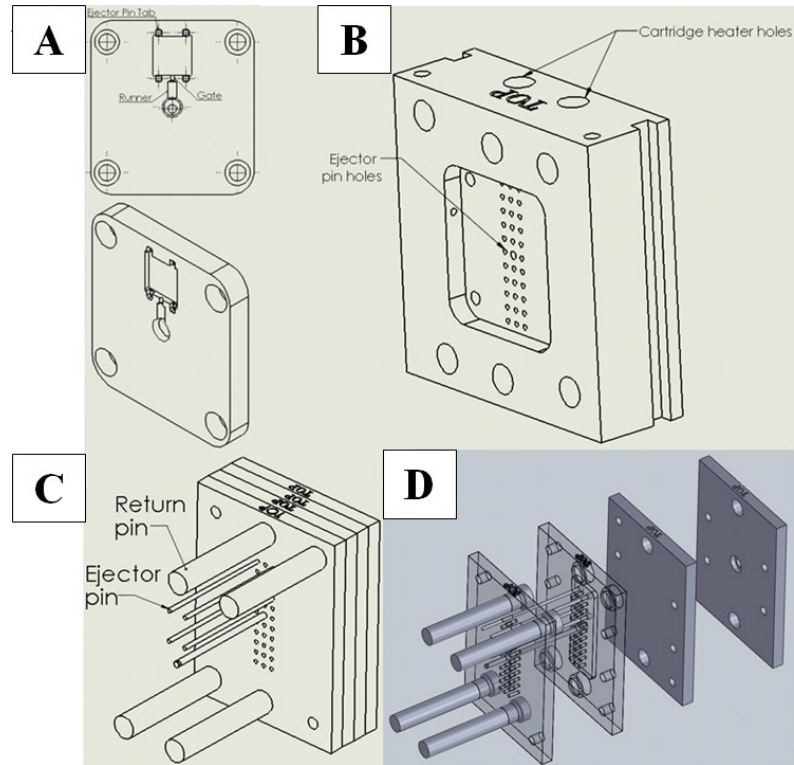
Aluminum insert (A), machined back half mold to incorporate cartridge heaters, ejector pins, and separate insert (B), and ejector system assembled (C) and exploded (D).
